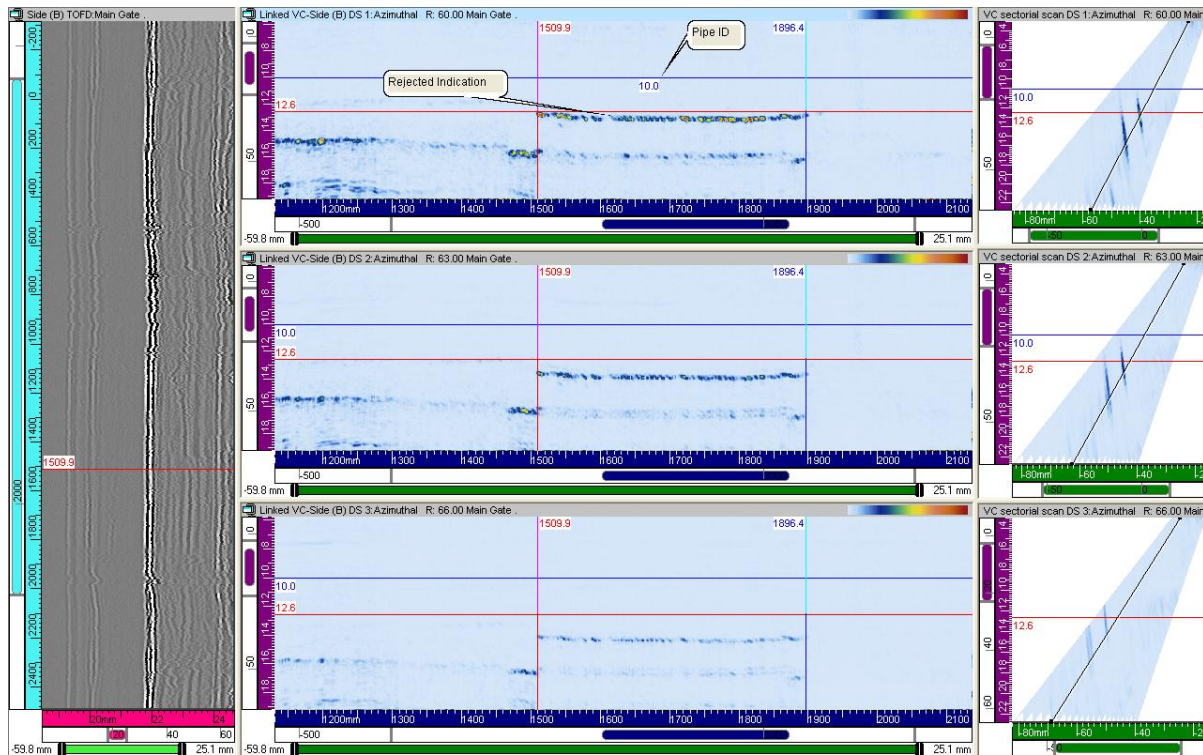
Weld MLA 4530 - EWI Scan Screen Capture - DS View
